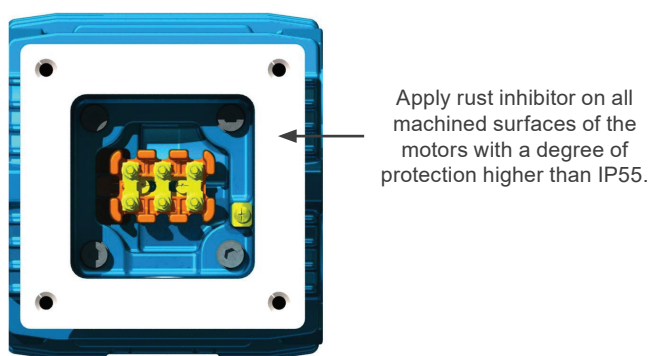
Machined surface of the terminal box of explosion-proof motors
